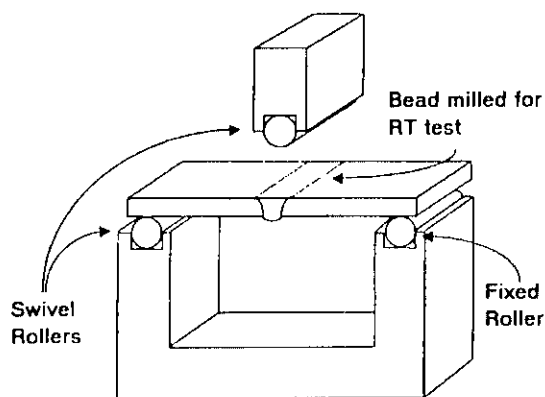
Schematic of three-point bend fixture with milled sample mounted for RT test.
